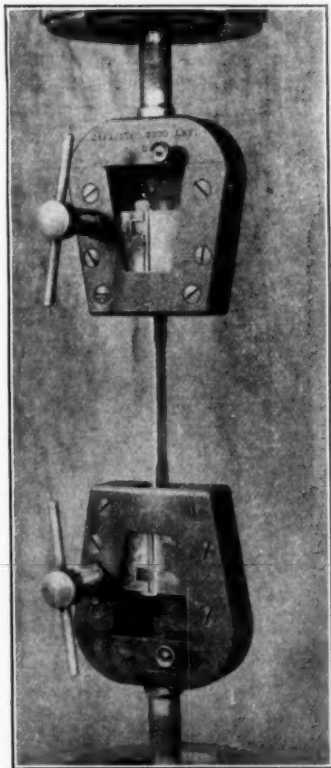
Showing Test Specimen in Position in the Holders of the Testing Machine.
